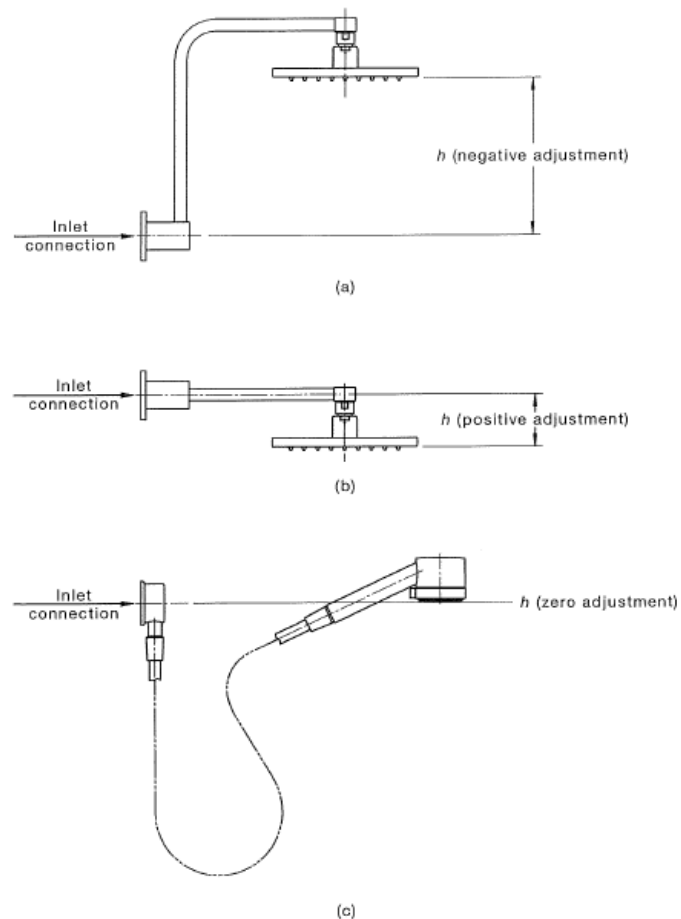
Typical Test Arrangement – Pressure Reading Adjustment
